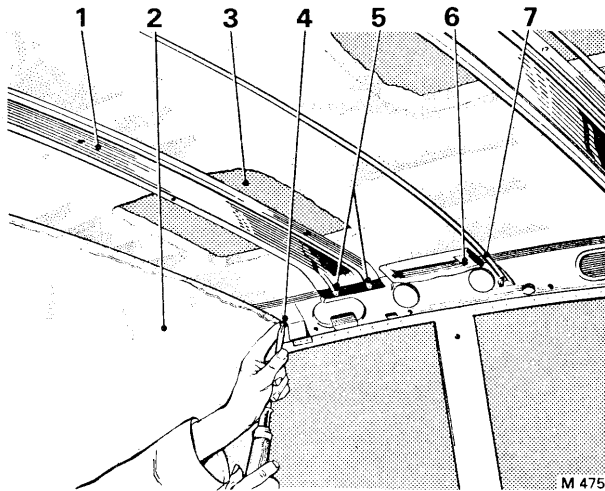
FITTING A HEAD LINING LISTING BAR (4-Door Saloon and Long Wheelbase Cars)
